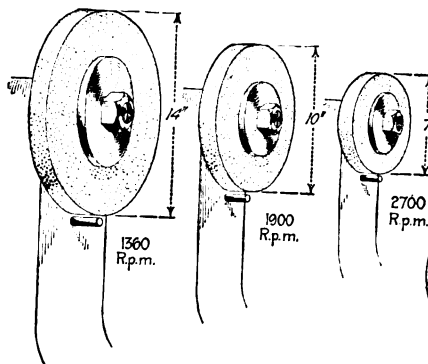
KEEPING GRINDING WHEELS AT PROPER SPEED
